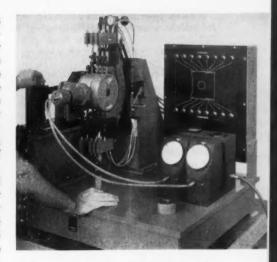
This illustration depicts a gaging system where a multiplicity of simultaneous checks could be obtained only by conveying the workpiece to the gaging apparatus.
